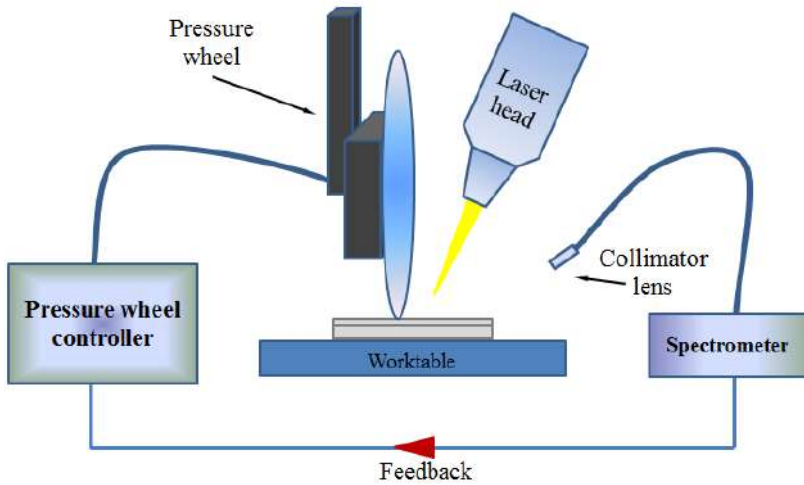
A schematic presentation of a closed-loop control system of the laser welding of galvanized steel by controlling the clamping force
